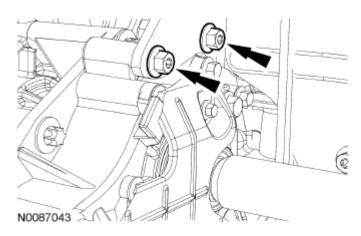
Locating RH Engine-To-Bellhousing Bolts Courtesy of FORD MOTOR CO.
